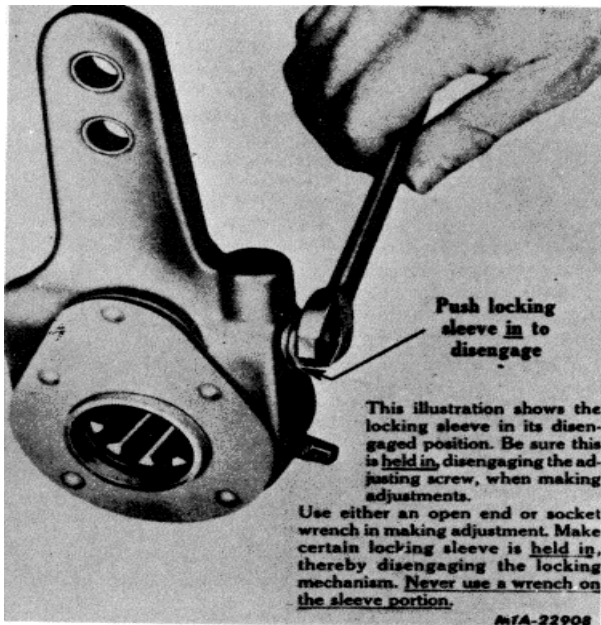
Slack Adjuster Locking Sleeve on Adjusting Nut
